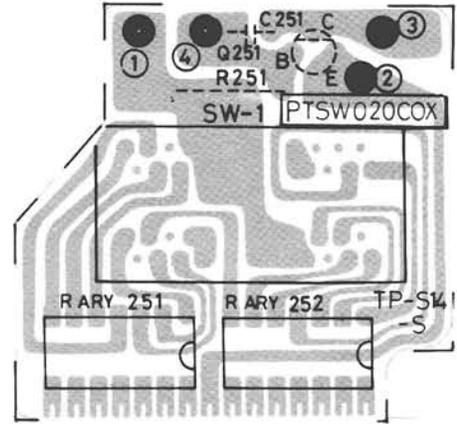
Channel Selector Printed Circuit Board – 14T304
